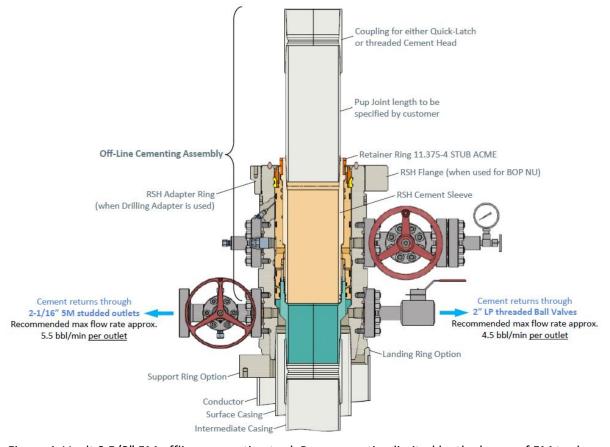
Vault 9 5/8" 5M offline cementing tool. Pressure rating limited by the lesser of 5M tool rating or the 9 5/8" pup joint and casing.
